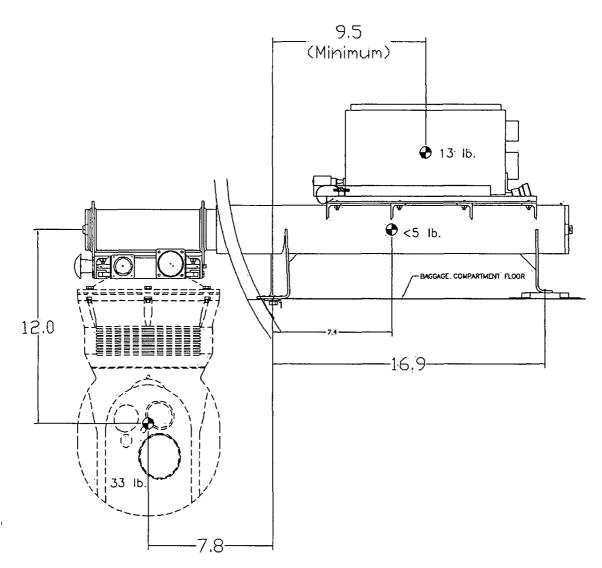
Representative Load Support Installation: IR-431-1 Assembly (Gimbal attached to IR-4301-10 and SX5-606-1), IR-1040-(X), C182IR-1012-1
